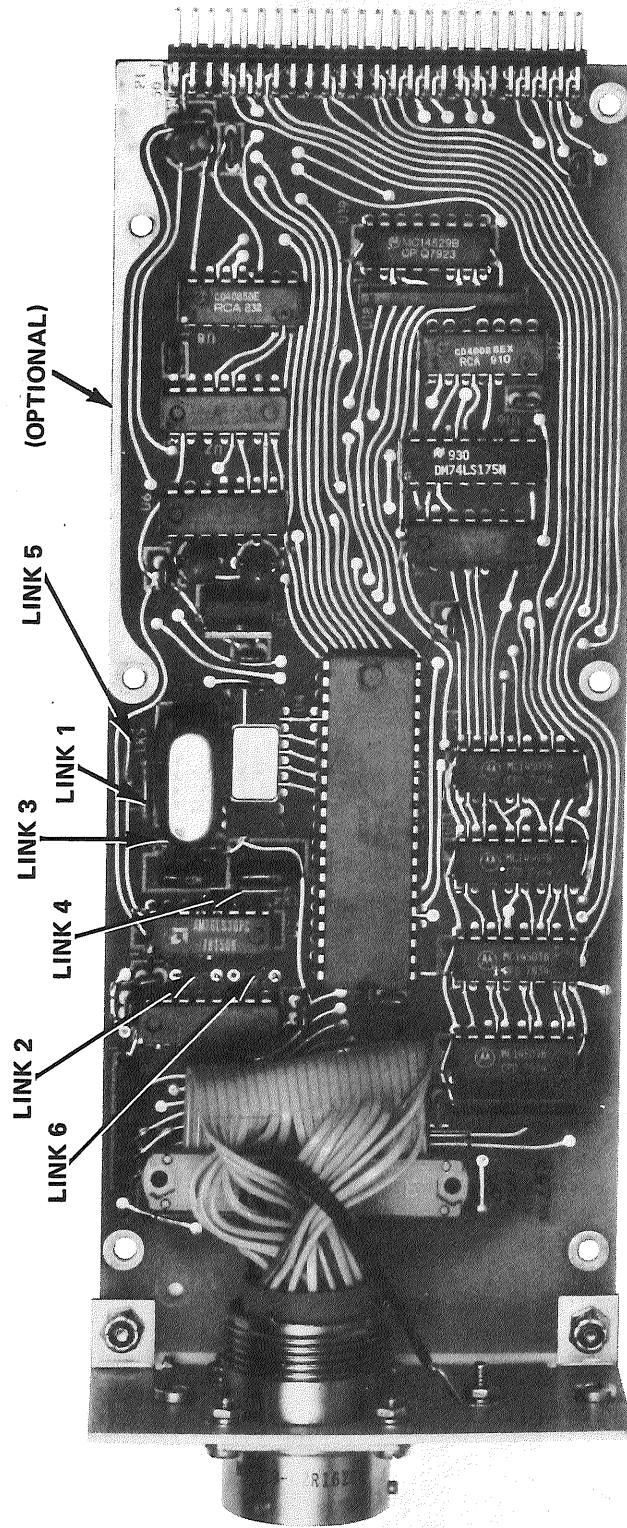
Optional A6A1 Circuit Card Assembly, Location of Jumpers
